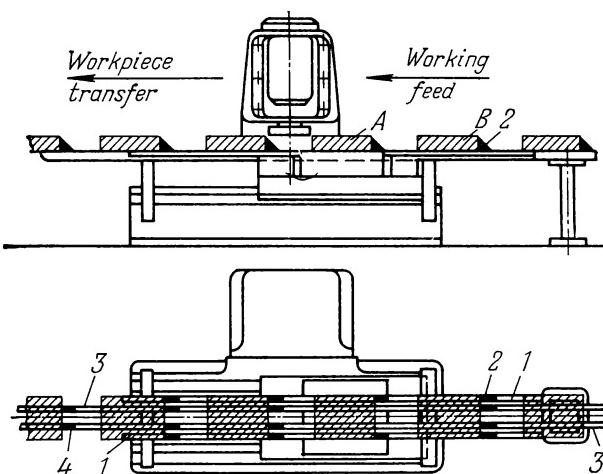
Planer-type milling machine arranged along the axis of the transfer machine
